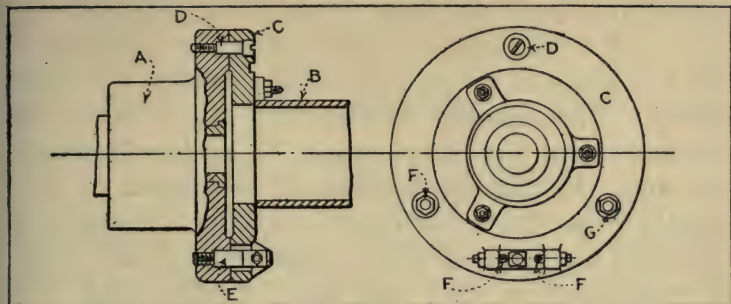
PLAN AND SECTION OF A SWINGING ECCENTRIC FIXTURE FOR A PACKING RING POT
